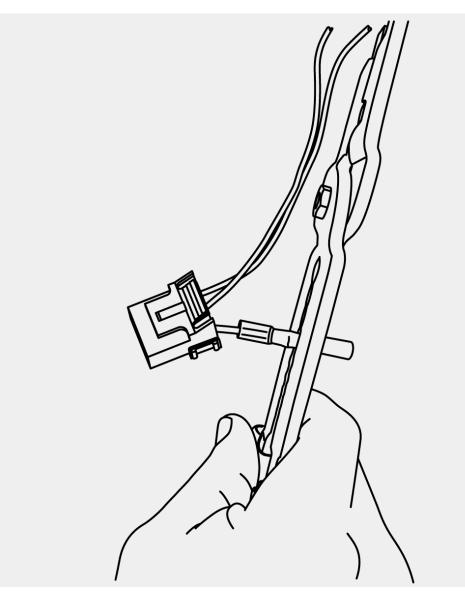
Tightly Close Handles Of Crimp Tool Courtesy of GENERAL MOTORS COMPANY
